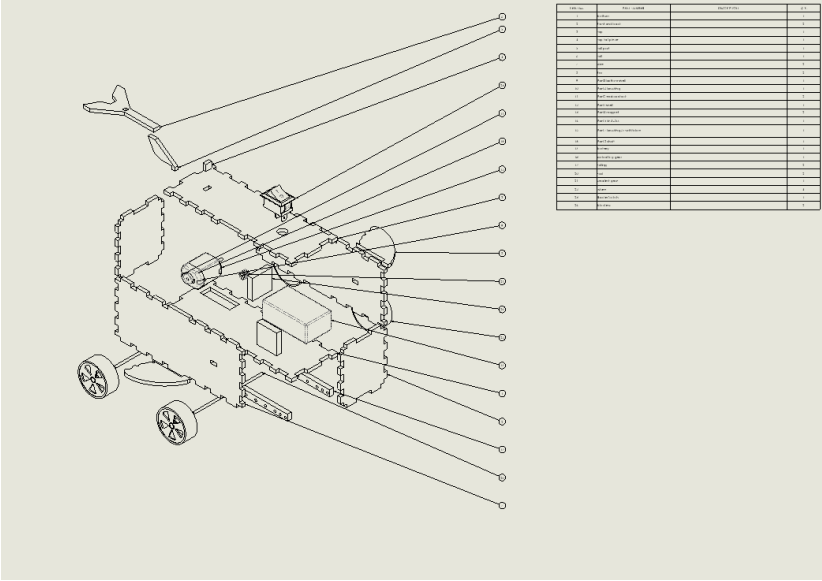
Exploded Assembly Drawing with Bill of Materials Table
